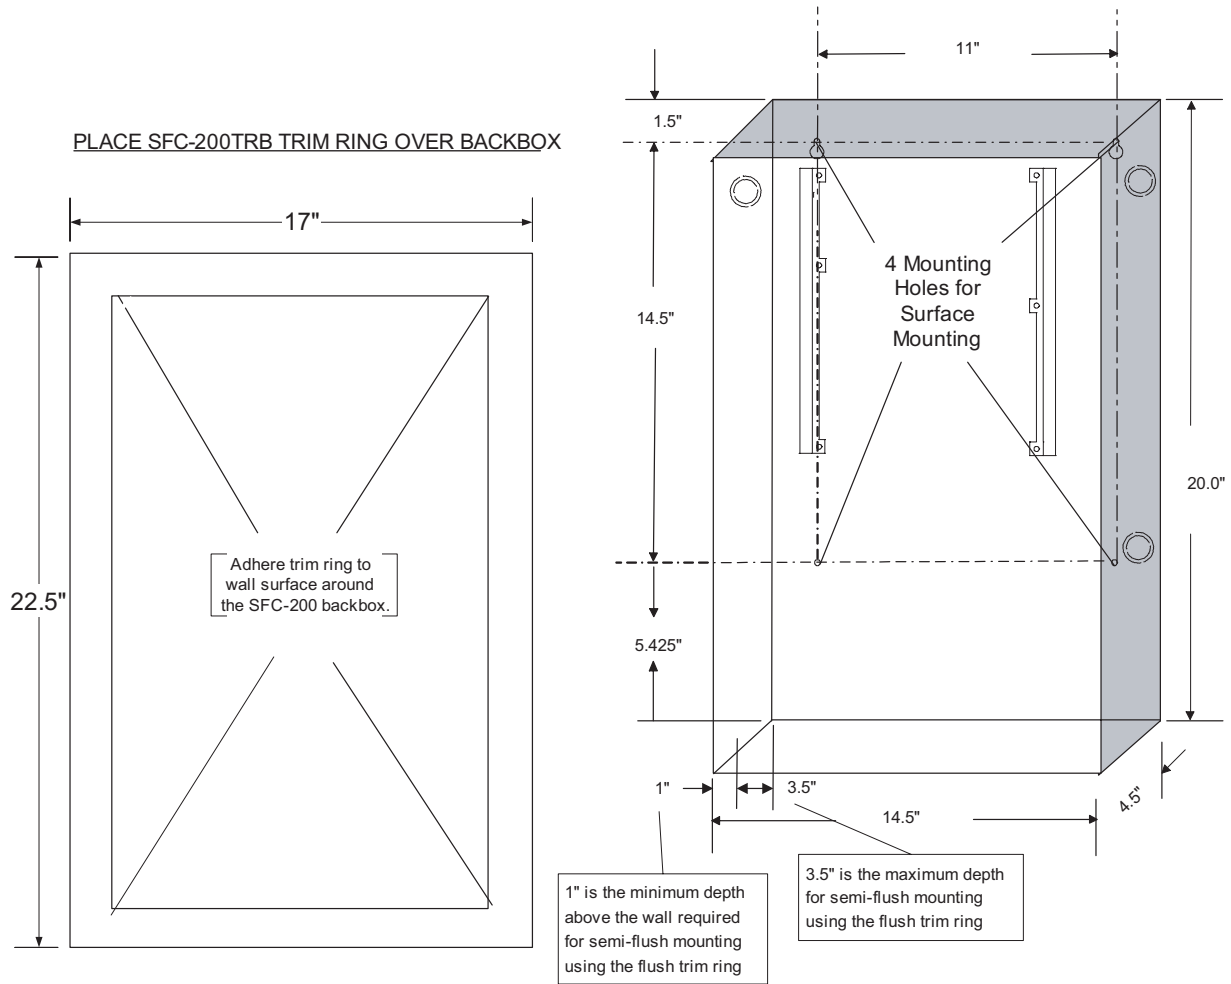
SFC-201-12DDR Box dimensions, semi-flush mounting with trim ring
